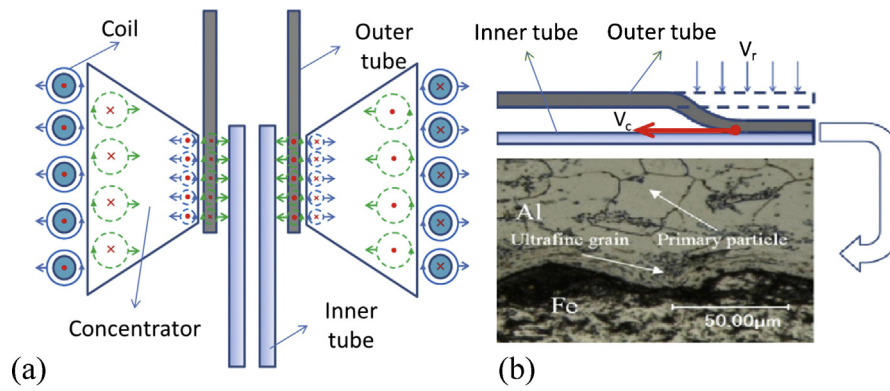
The production of magnetic pulse welding: (a) schematic of the current in MPW; (b) a successful welding structure with a transition zone.
